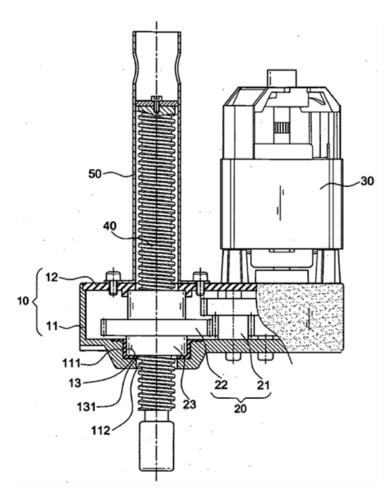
illustrates a gearing comprising primarily only a screw-and-nut mechanism. Rotation of nut (23) results in linear movement of screw (40). It is noted that the gearing comprises a simple set of toothed gears (20). However, the primary functioning of the gearing consists of the screw and nut, and the presence of a simple set of gears is not sufficient to consider the gearing more than primarily a screw-and-nut mechanism.
